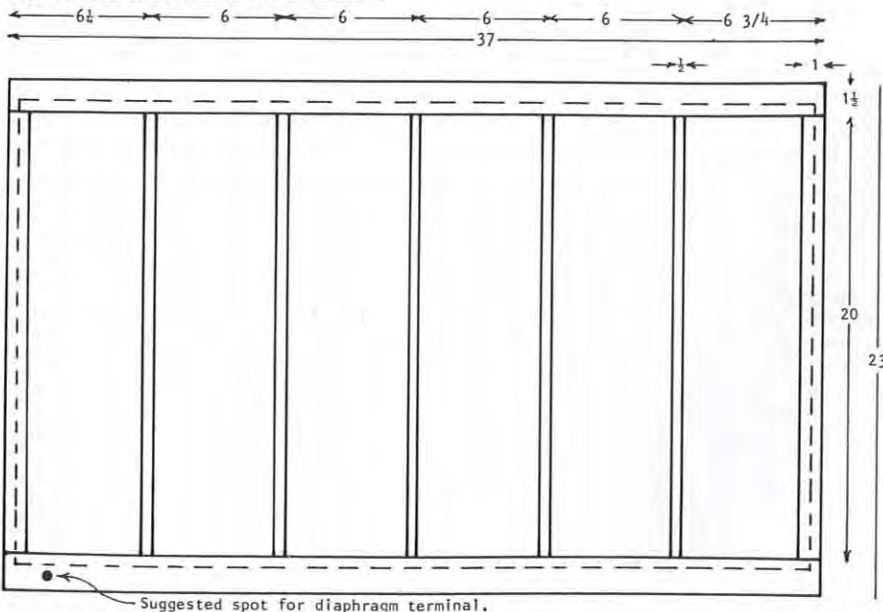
C: PERFORATED METAL STATOR ASSEMBLY
